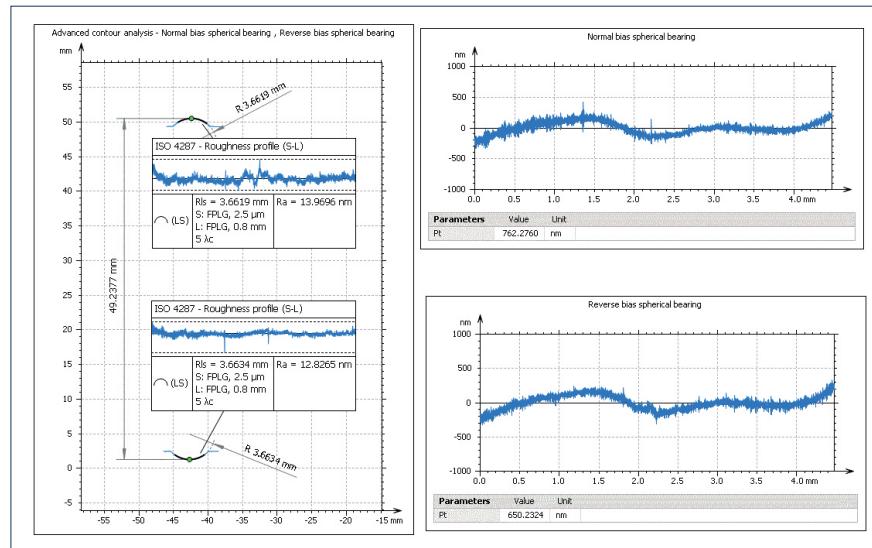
Full analysis of spherical bearing including, diameter, radius, surface finish and form
